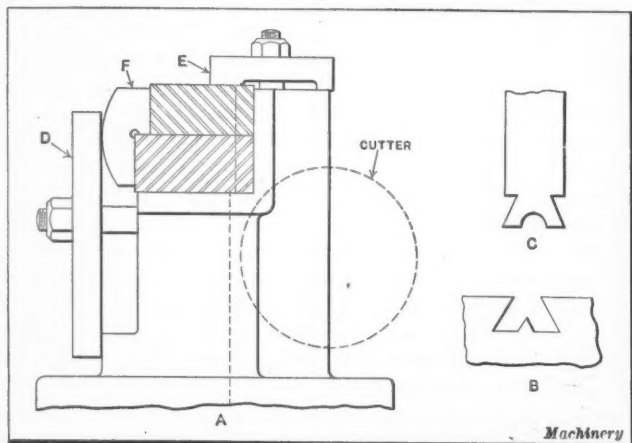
(A) Diagram showing Method employed in holding Bars on Milling Fixture. (B) Appearance of Groove after Both Sides have been machined. (C) End of Gage used in inspecting the Grooves
